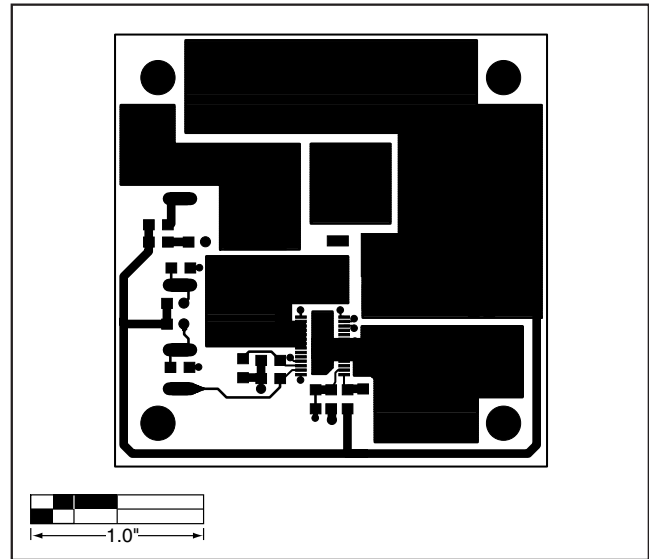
MAX1709 EV Kit PC Board Layout—Component Side
